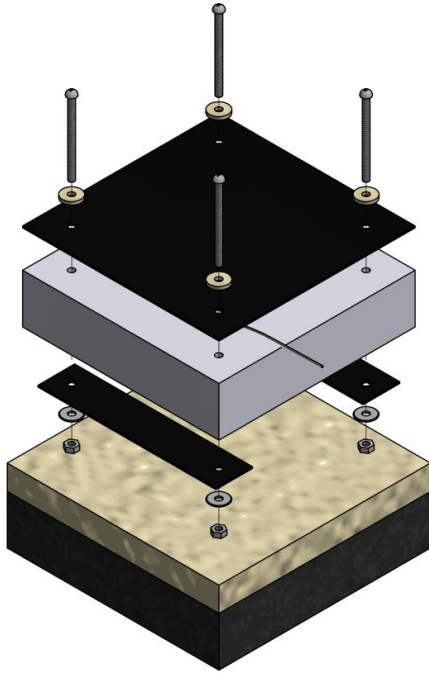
Exploded view of modified plate thermometer with cone calorimeter sample holder
